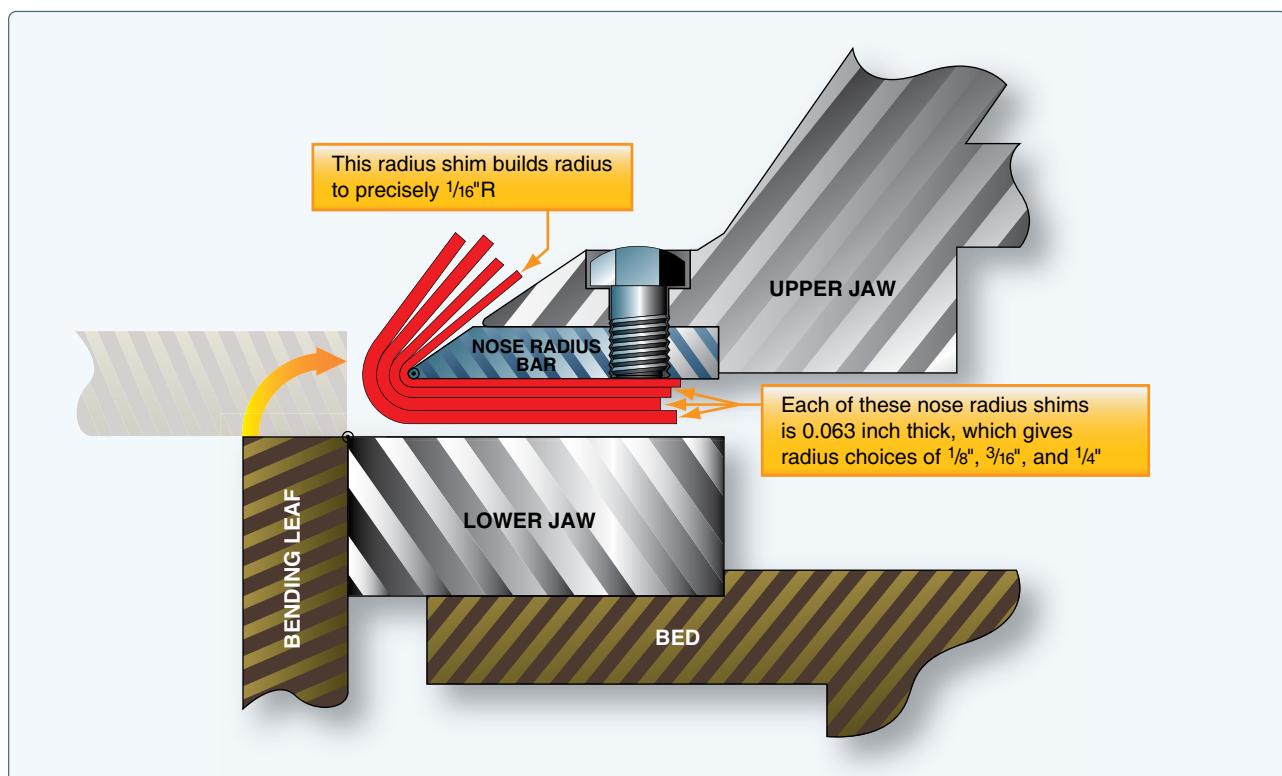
Nose radius shims may be used when the brake radius bar is smaller than required.
